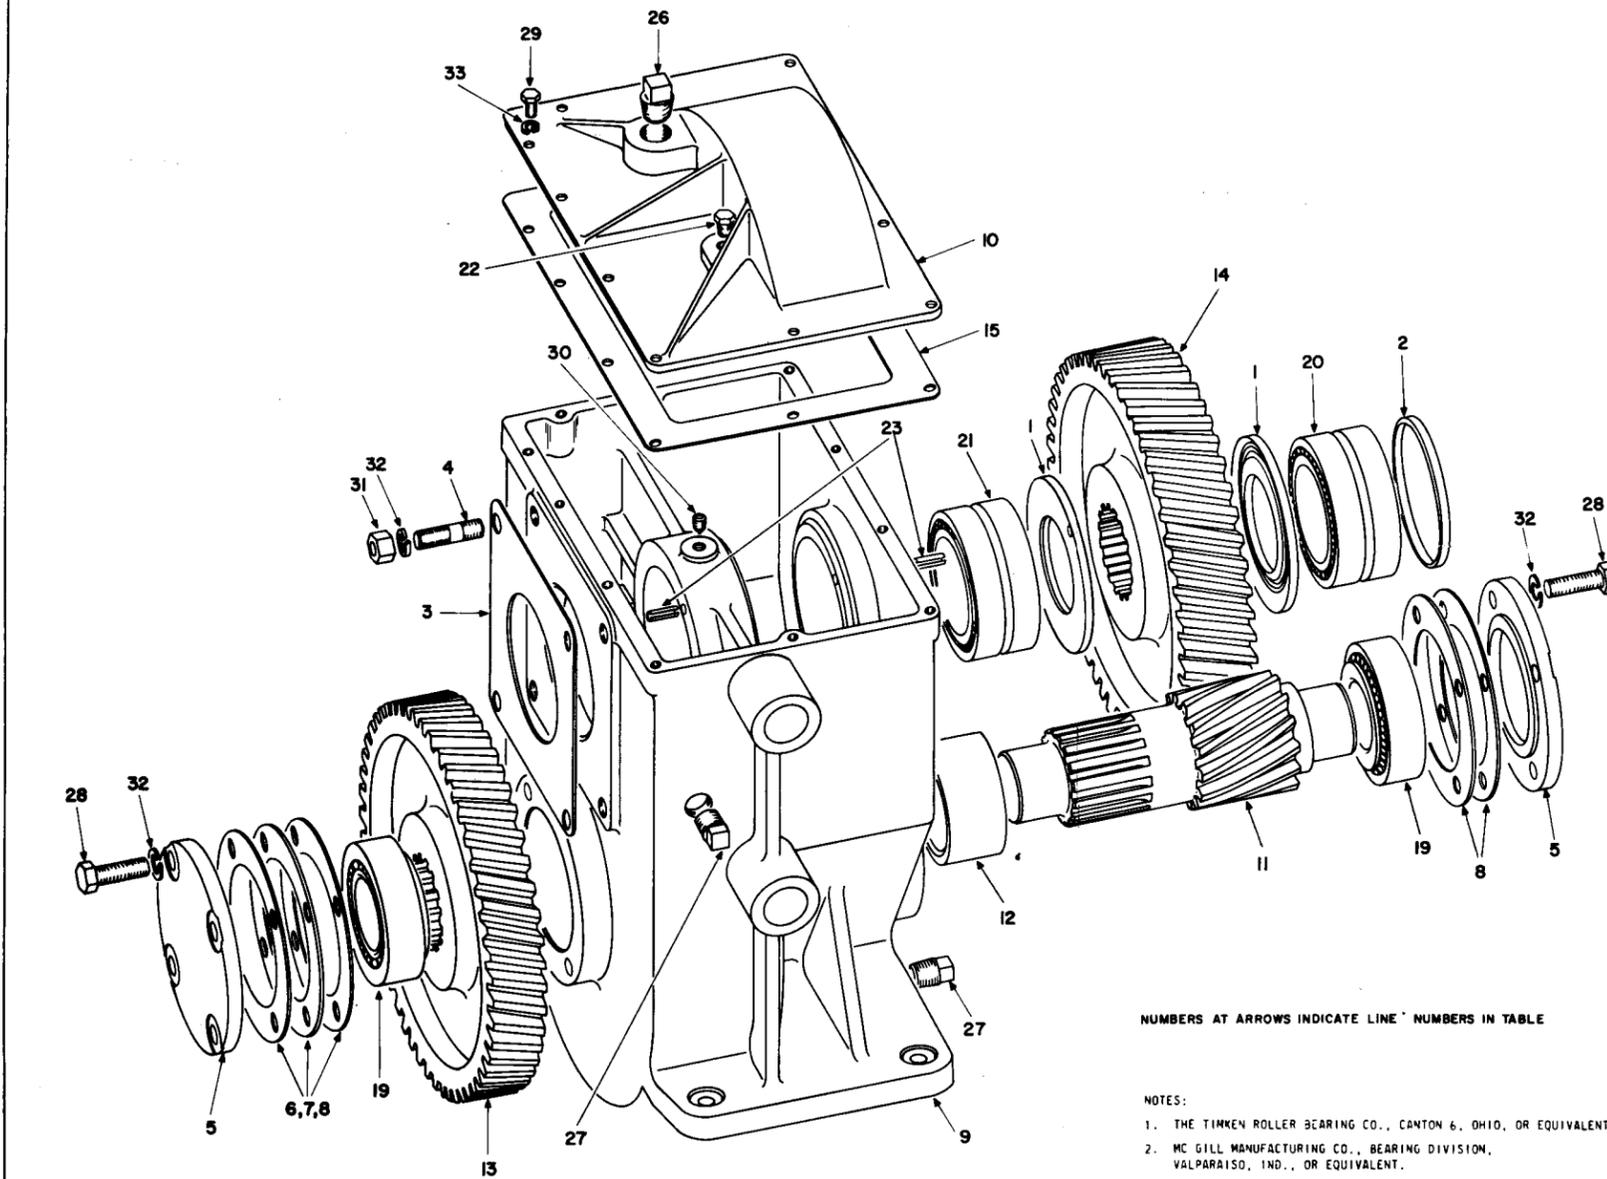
Drive and Safety Brake Assembly Repair Parts Form, Sheet 2
